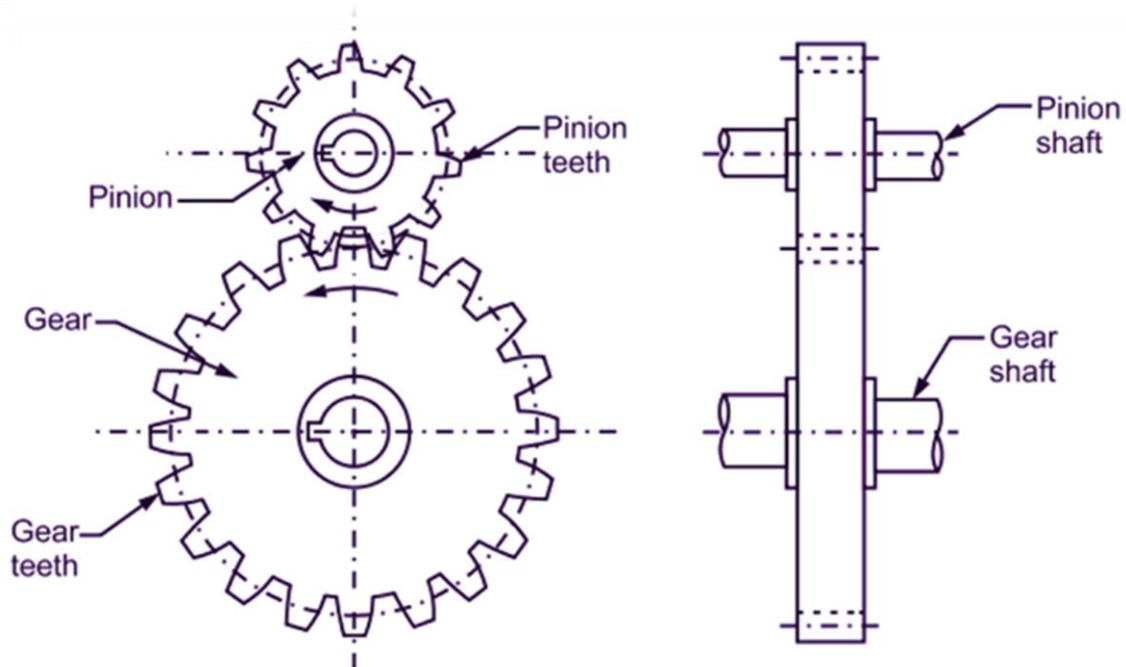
Gear-driven system assembly consisting of a drive gear (pinion) and a driven gear
